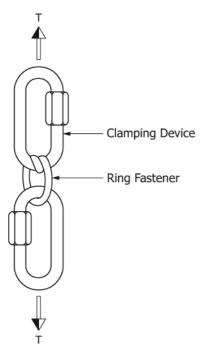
Single Fastener Test with Load Applied Perpendicular to the Closing Axe
